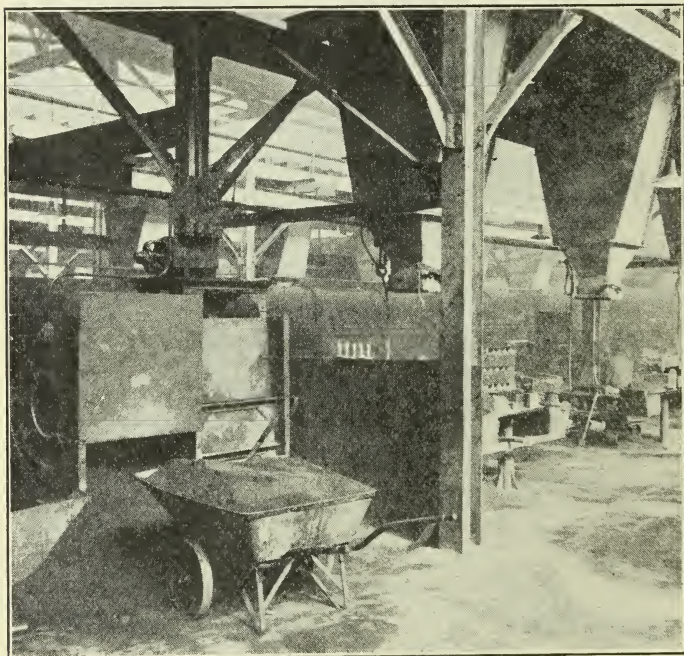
HOPPERS SUPPLYING SAND THAT STILL RETAINS SOME HEAT FROM THE PREVIOUS CASTING TO THE MOLDING MACHINES
